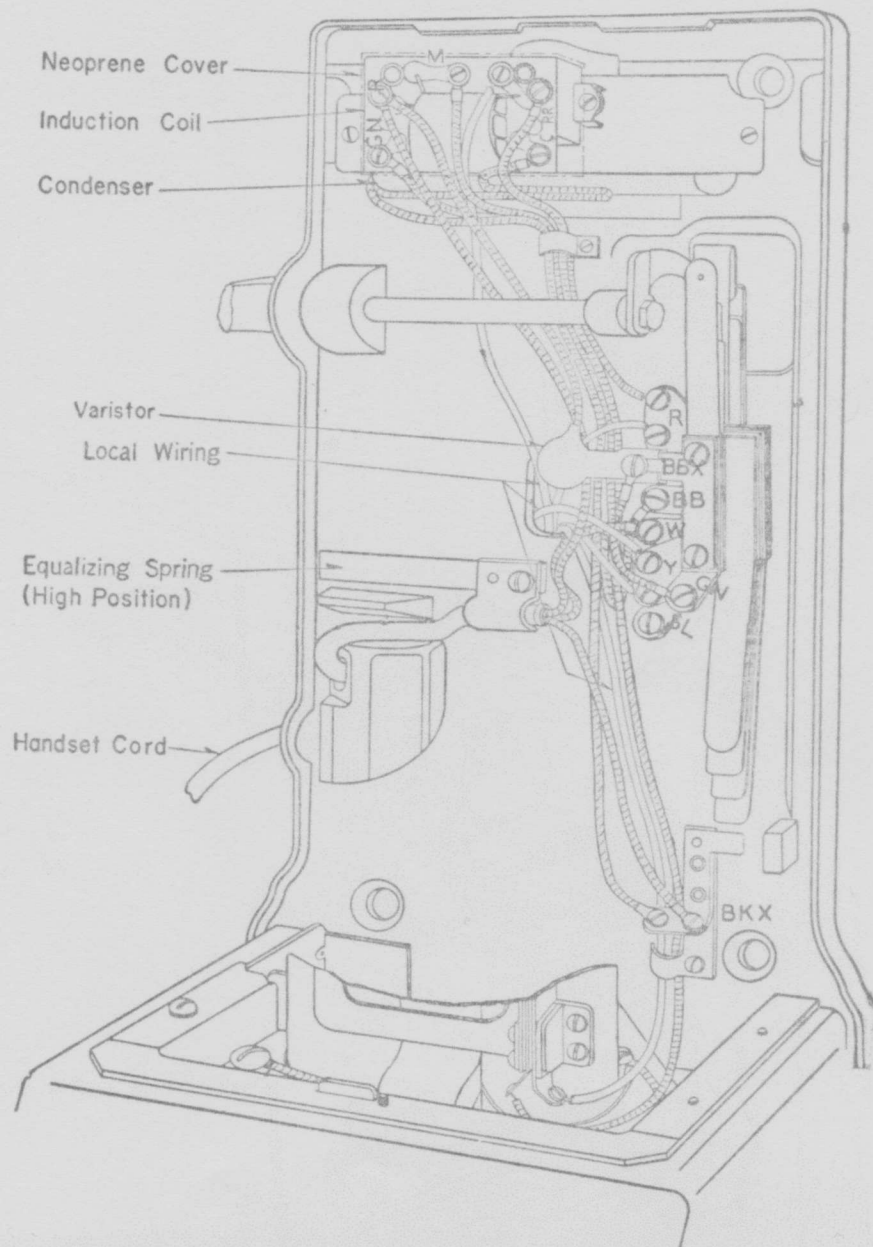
181 or 183-type Coin Collector—Lower Housing and Backplate Assembly
